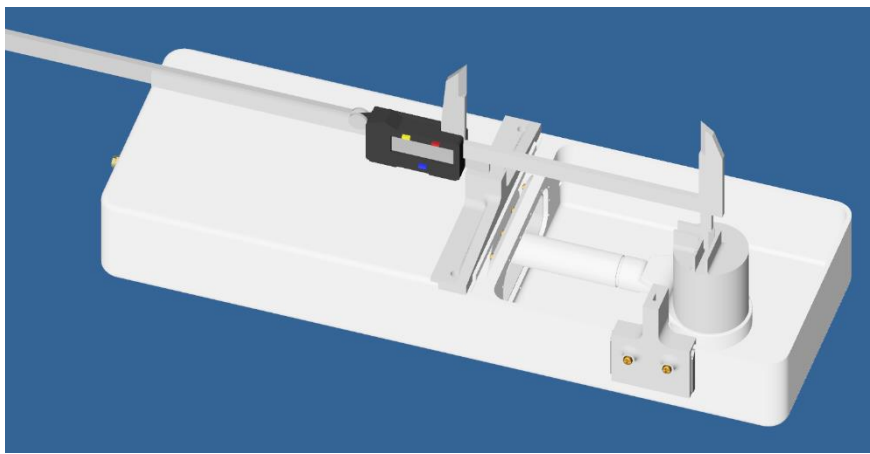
CAD drawing of the set-up that was used to estimate the accuracy of the X axis motion.
